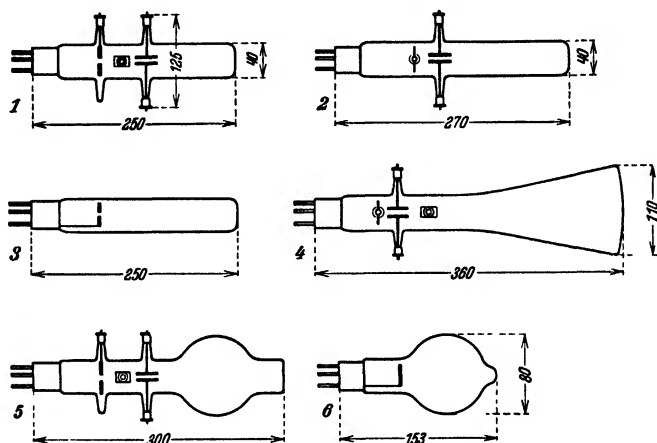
ASSEMBLY AND DIMENSIONS OF COMMERCIAL TUBES FOR SOUND RECORDING
